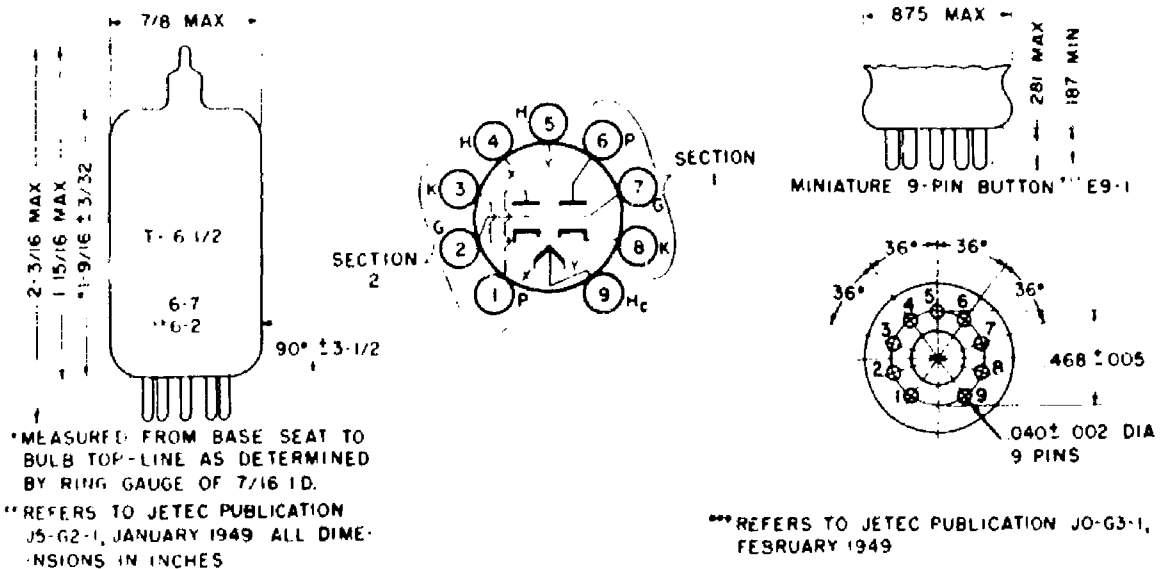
Outline Drawing and Base Diagram of Tube Type JAN-5751
